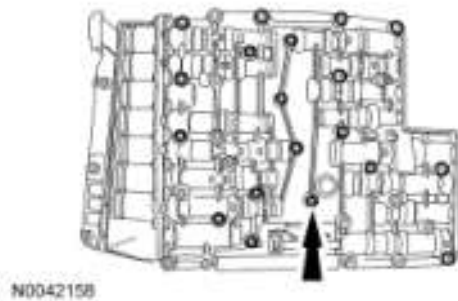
Locating Short Bolts From Mechatronic Assembly
